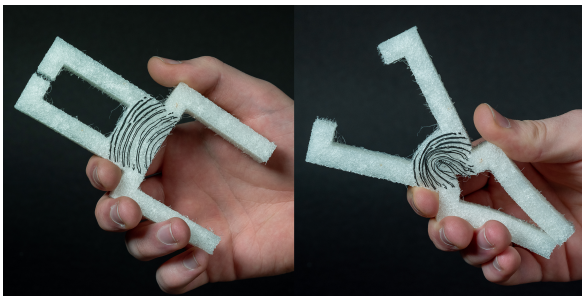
Pliers printed with our method. The direction control induces the movement. Scaling control is used to rigidify the hand grips and the jaws, only allowing bending in the joint part.
